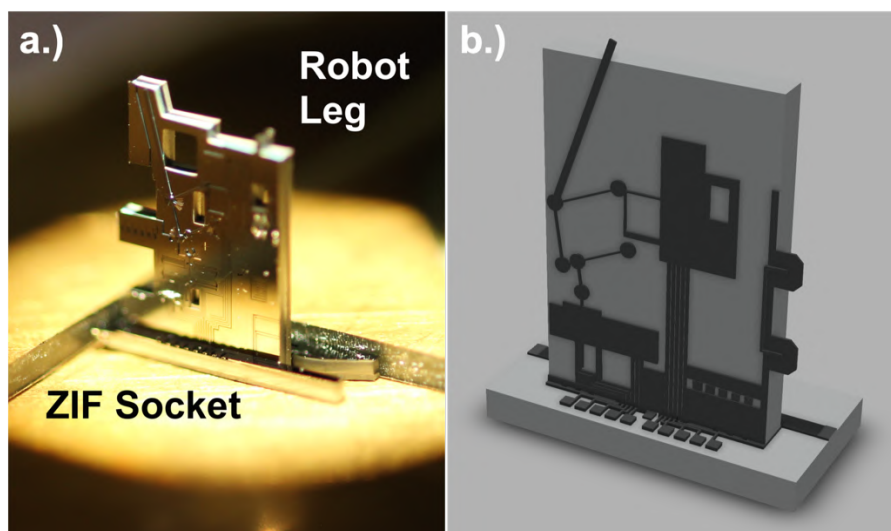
a.) A microrobot leg similar to the one presented in [36] assembled inside a ZIF socket. The leg is pointing up in this case. b.) A 3D model of the ZIF socket design and robot leg chip assembly seen in part a.).
